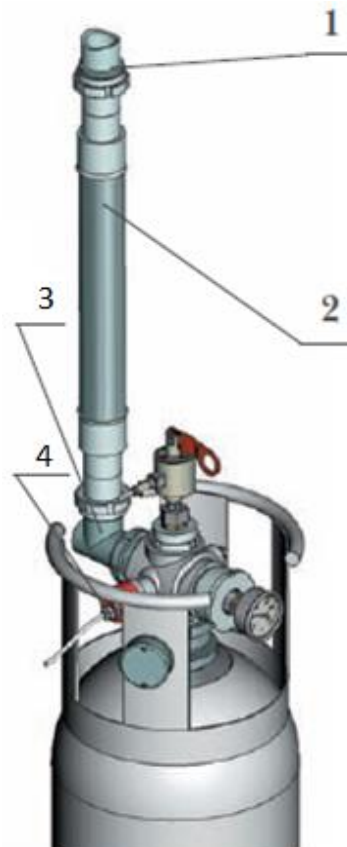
Overall view of connection of a module with a shut-off valve to hose PВД
